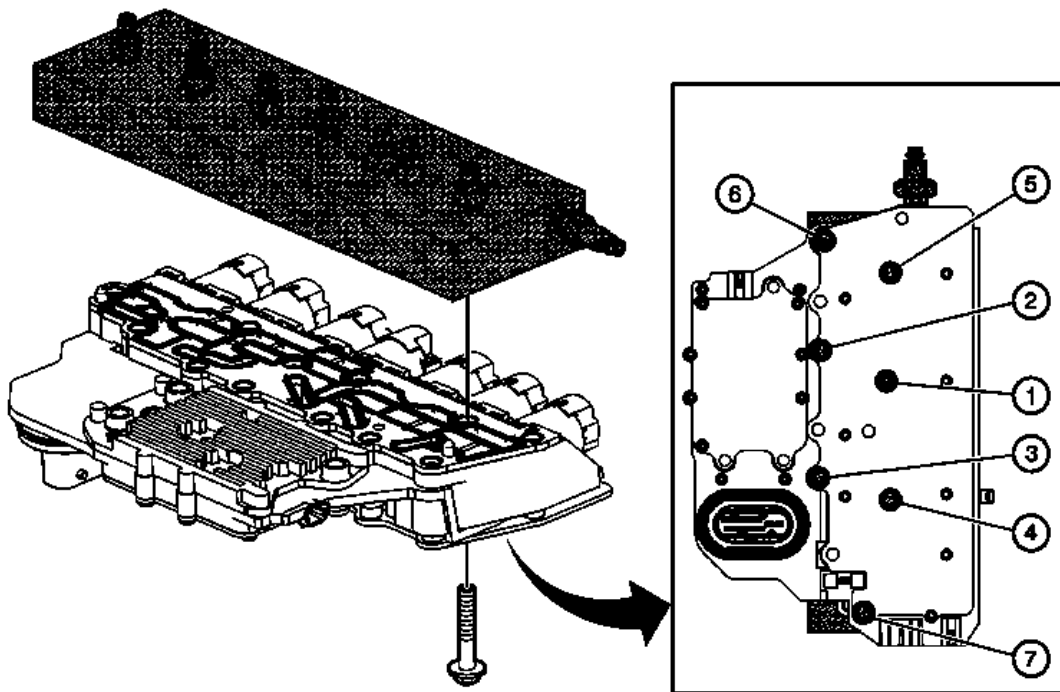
Identifying Control Solenoid (W/Body & TCM) Valve Assembly Test Points
